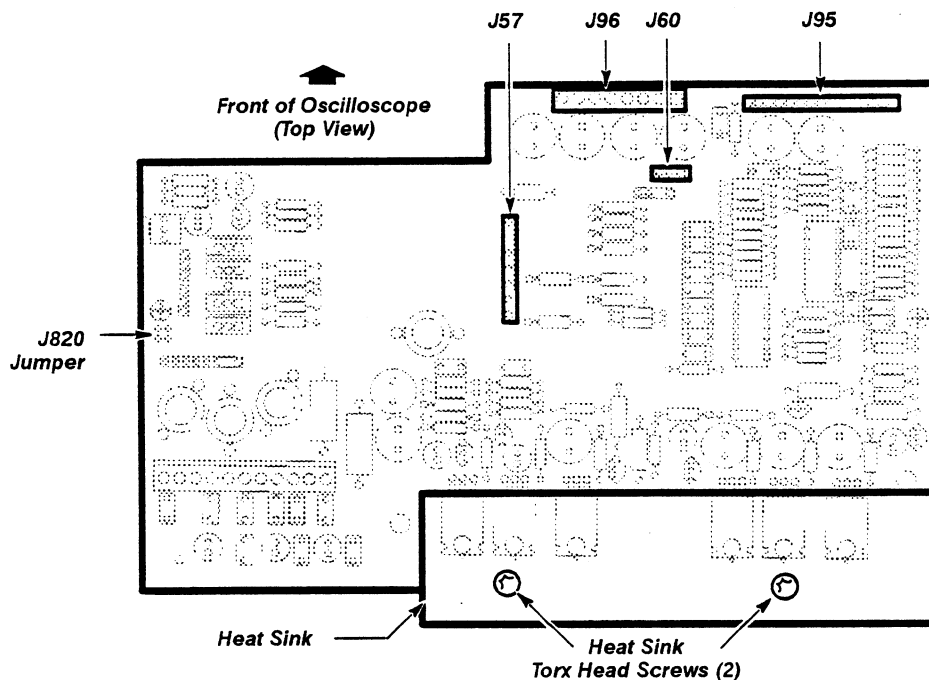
Removing/Replacing the A4 Regulator Board
